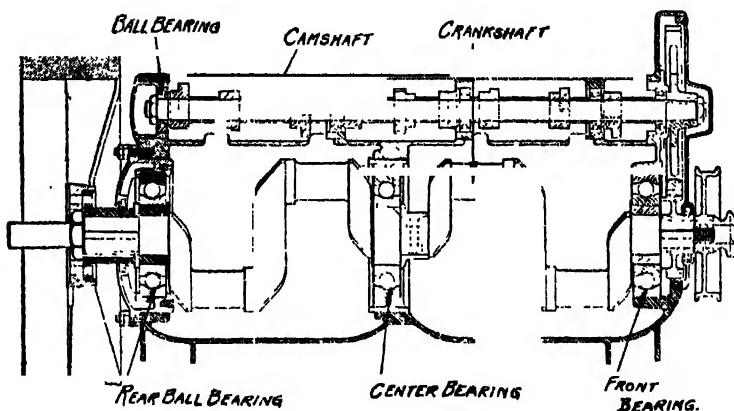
Showing Practical Application of Ball Bearings for Crankshaft and Camshaft Support.
